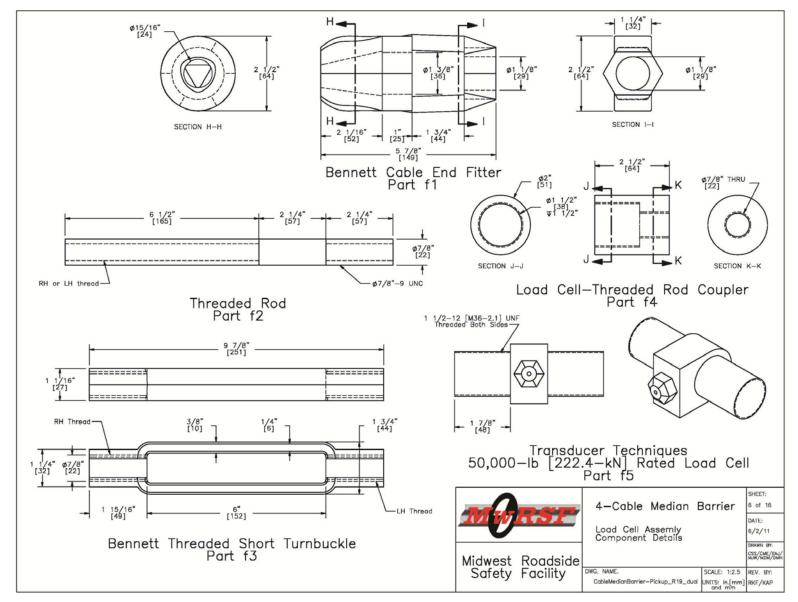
Load Cell Assembly Component Details, Test No. 4CMB-1
